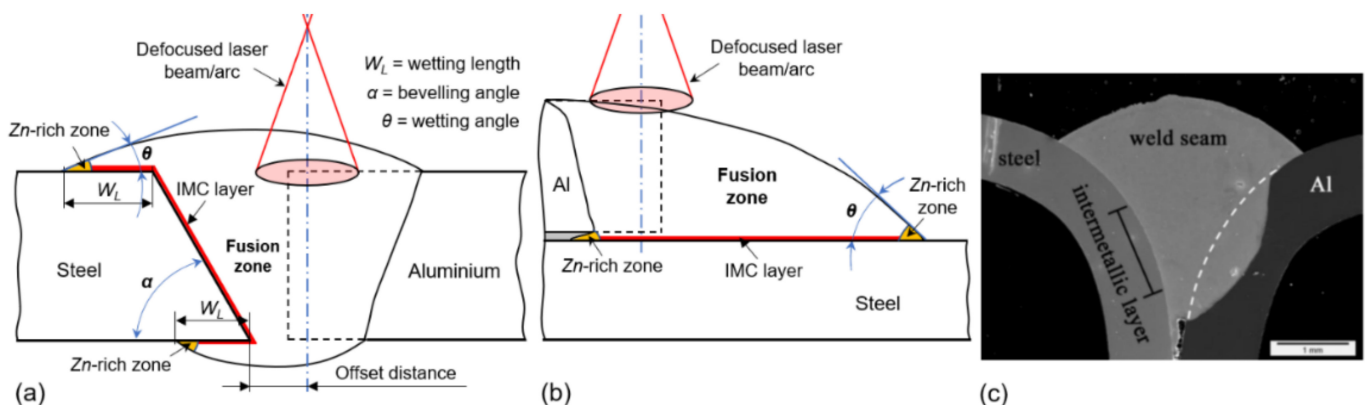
(a) Schematic illustration of typical butt joint produced by laser-assisted arc welding–brazing process, based on [41,46,47,72,81]. Laser welding–brazing of (b) overlap (fillet) joint, based on [45,73,82–86]; and (c) flanged butt or flare V-groove (fillet) joint [82]. Note, steel does not usually melt.
